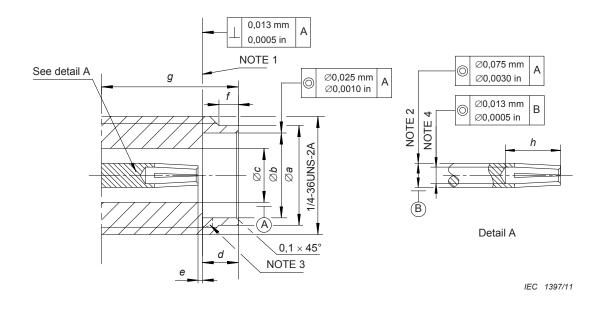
Connector with socket-centre contact (for dimensions and notes, see Table 5)
